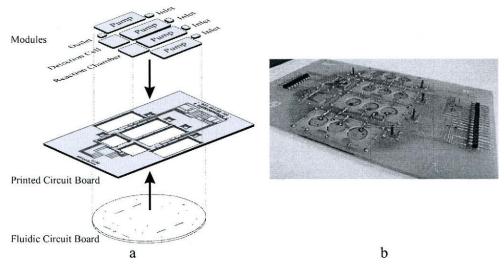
Modular hybrid analysis system according to MATAS approach, a) schematic drawing (exploded view), b) photograph of the manufactured system with mounted modules.
